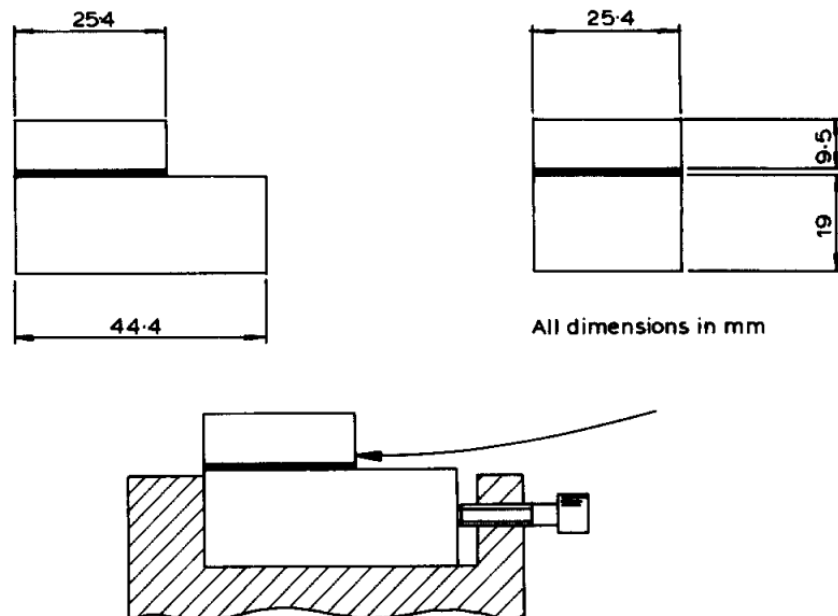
ASTM block impact test (ASTM D950-78) [12]
